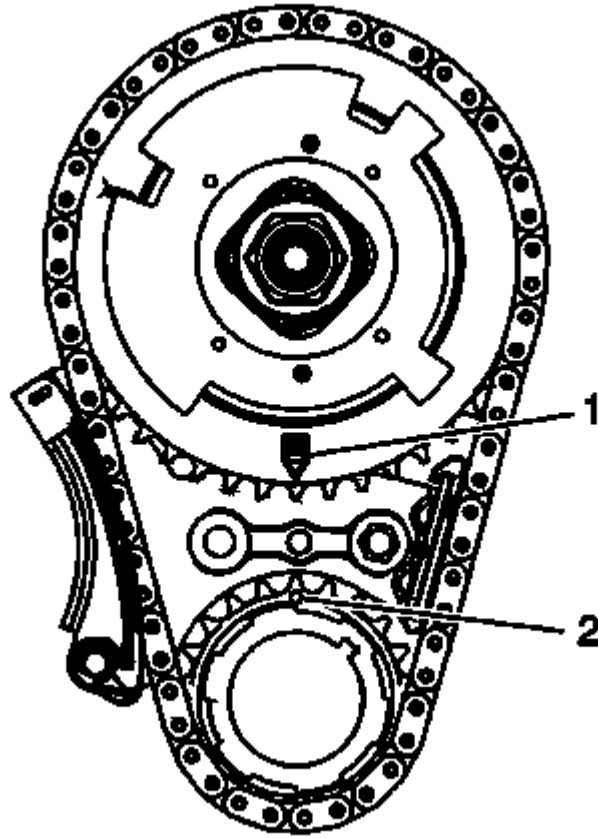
View Of CMP Actuator Alignment Mark & Crankshaft Sprocket Alignment Mark
